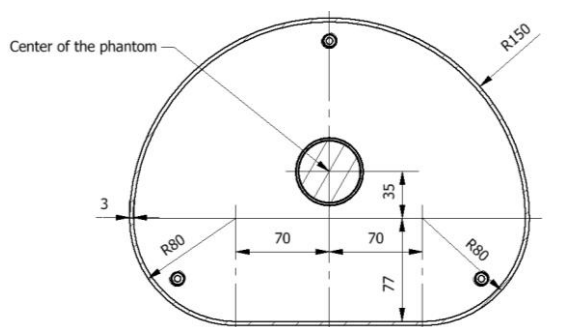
Transversal engineering drawing view of the NEMA Body PET phantom ⁵
